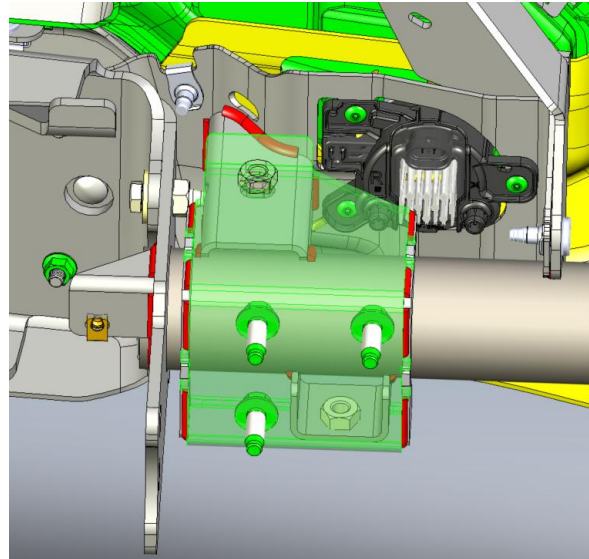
Passenger side fitment of Bumper to Frame Bracket
